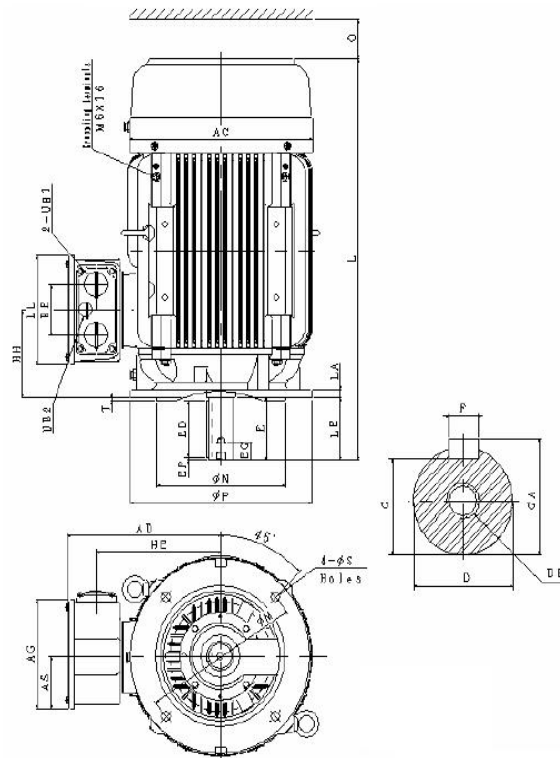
Outline drawing of cast iron design, mounting V1; frame size 180
